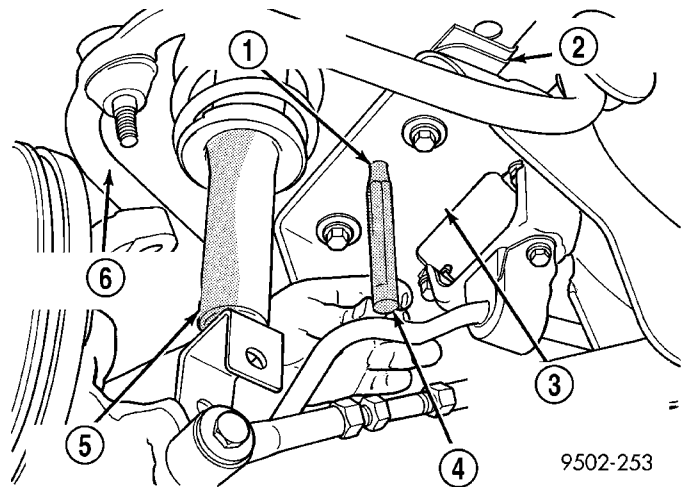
Locating Rear Suspension Crossmember In Vehicle
